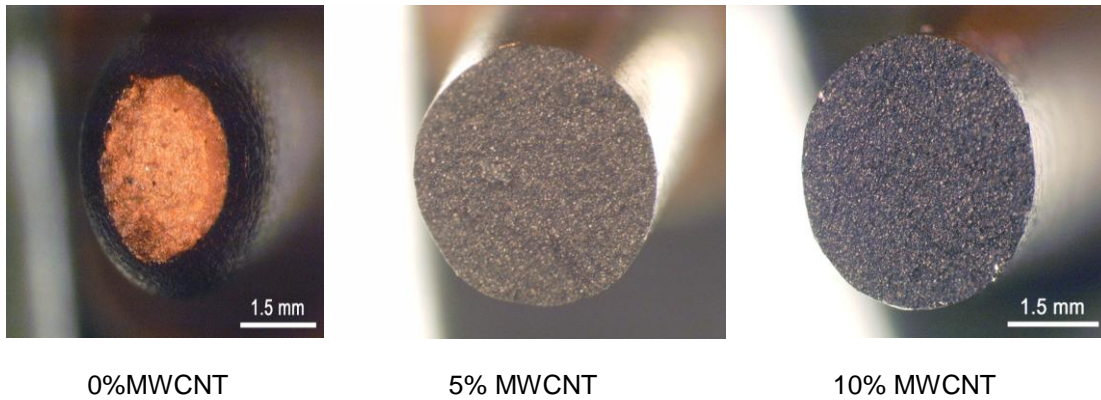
B: NARloy-Z-MWCNT tensile fracture surfaces
